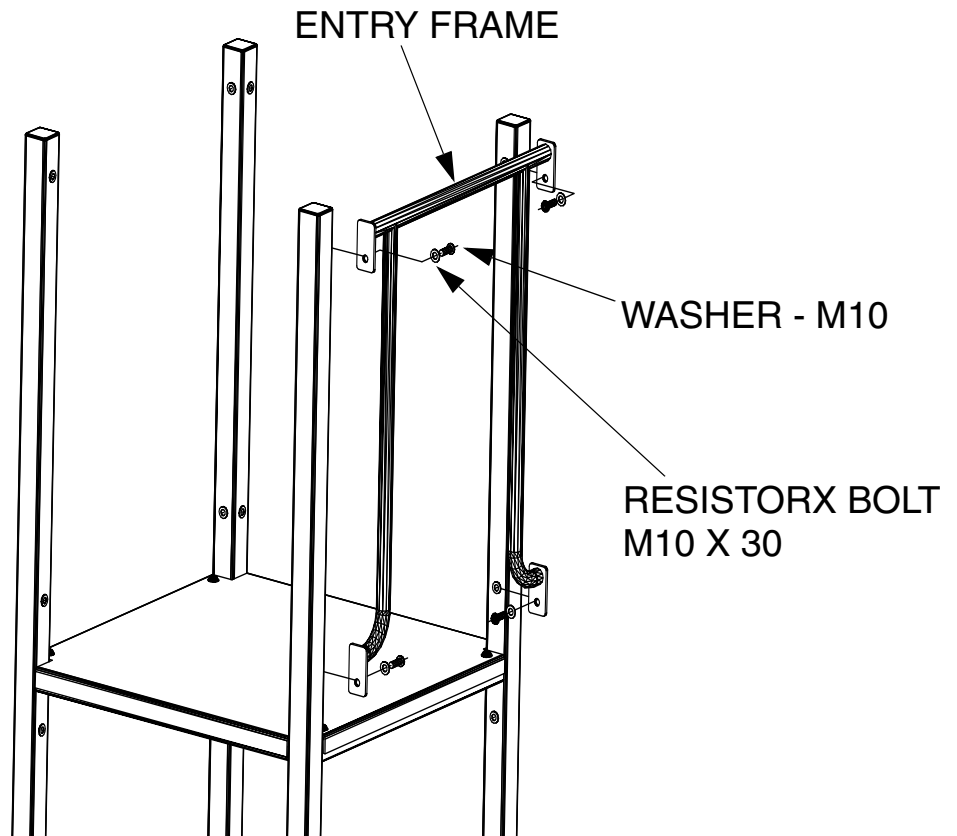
TYPICAL FIXING ARRANGEMENT FOR ENTRY FRAME
